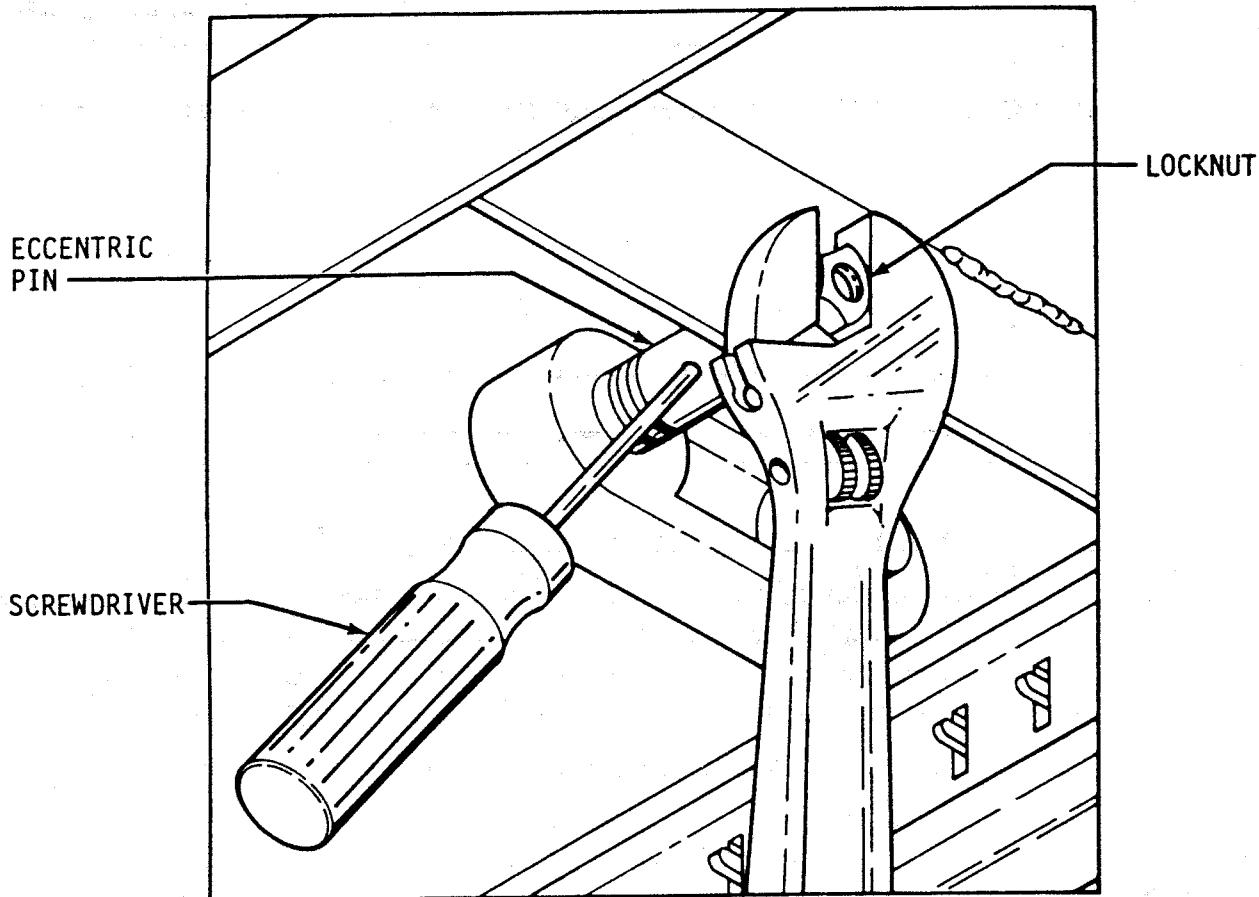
Adjusting Blade Frames Using Eccentric Pins
